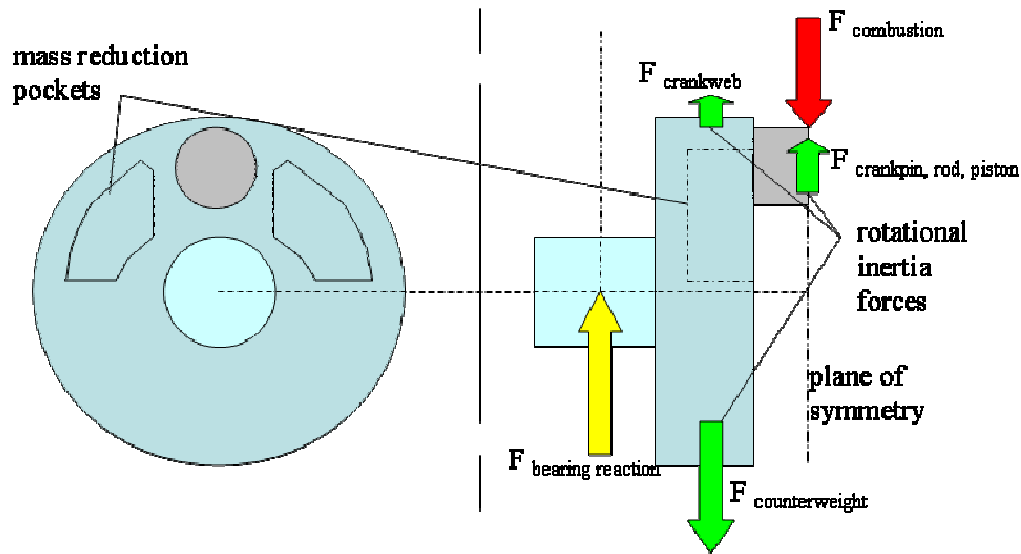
Crankpin bending calculation for approximate pin sizing.
